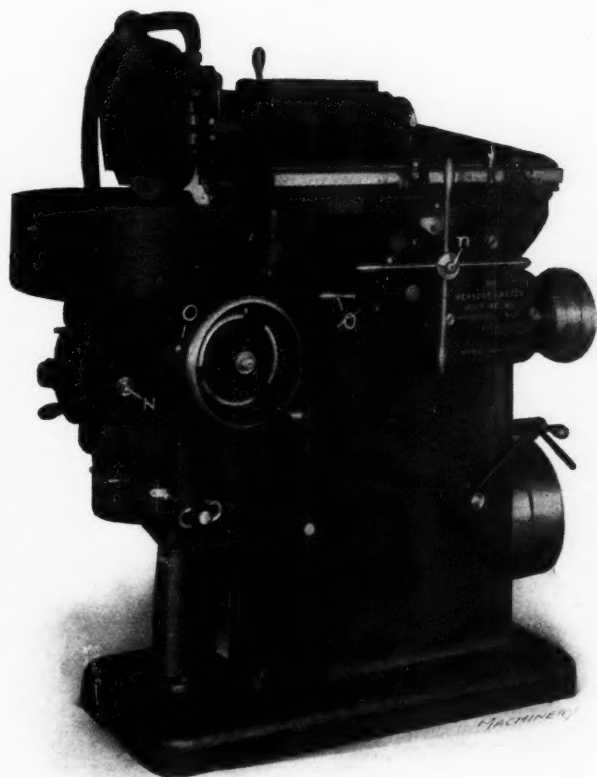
Persons-Arter "Model A" Rotary Surface Grinder
